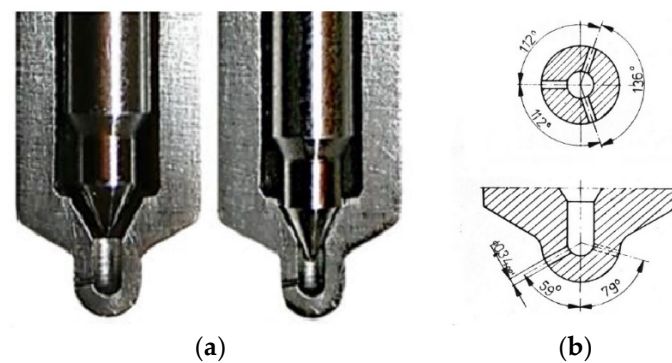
The D1LMK148/1 atomizer: (a) cross-section in the open (left) and closed (right) positions; (b) dimensions and locations of openings in the atomizer nozzle [99].
